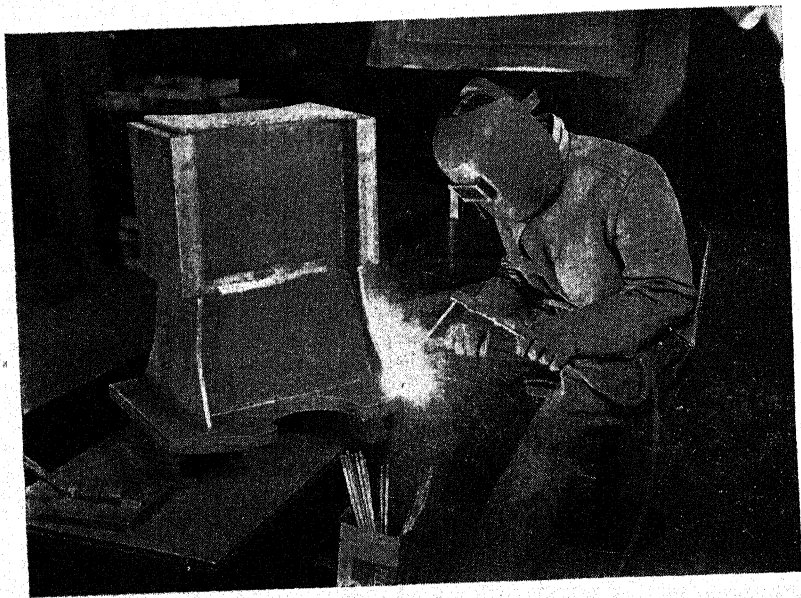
Arc welding upper pedestal for dome drive.
